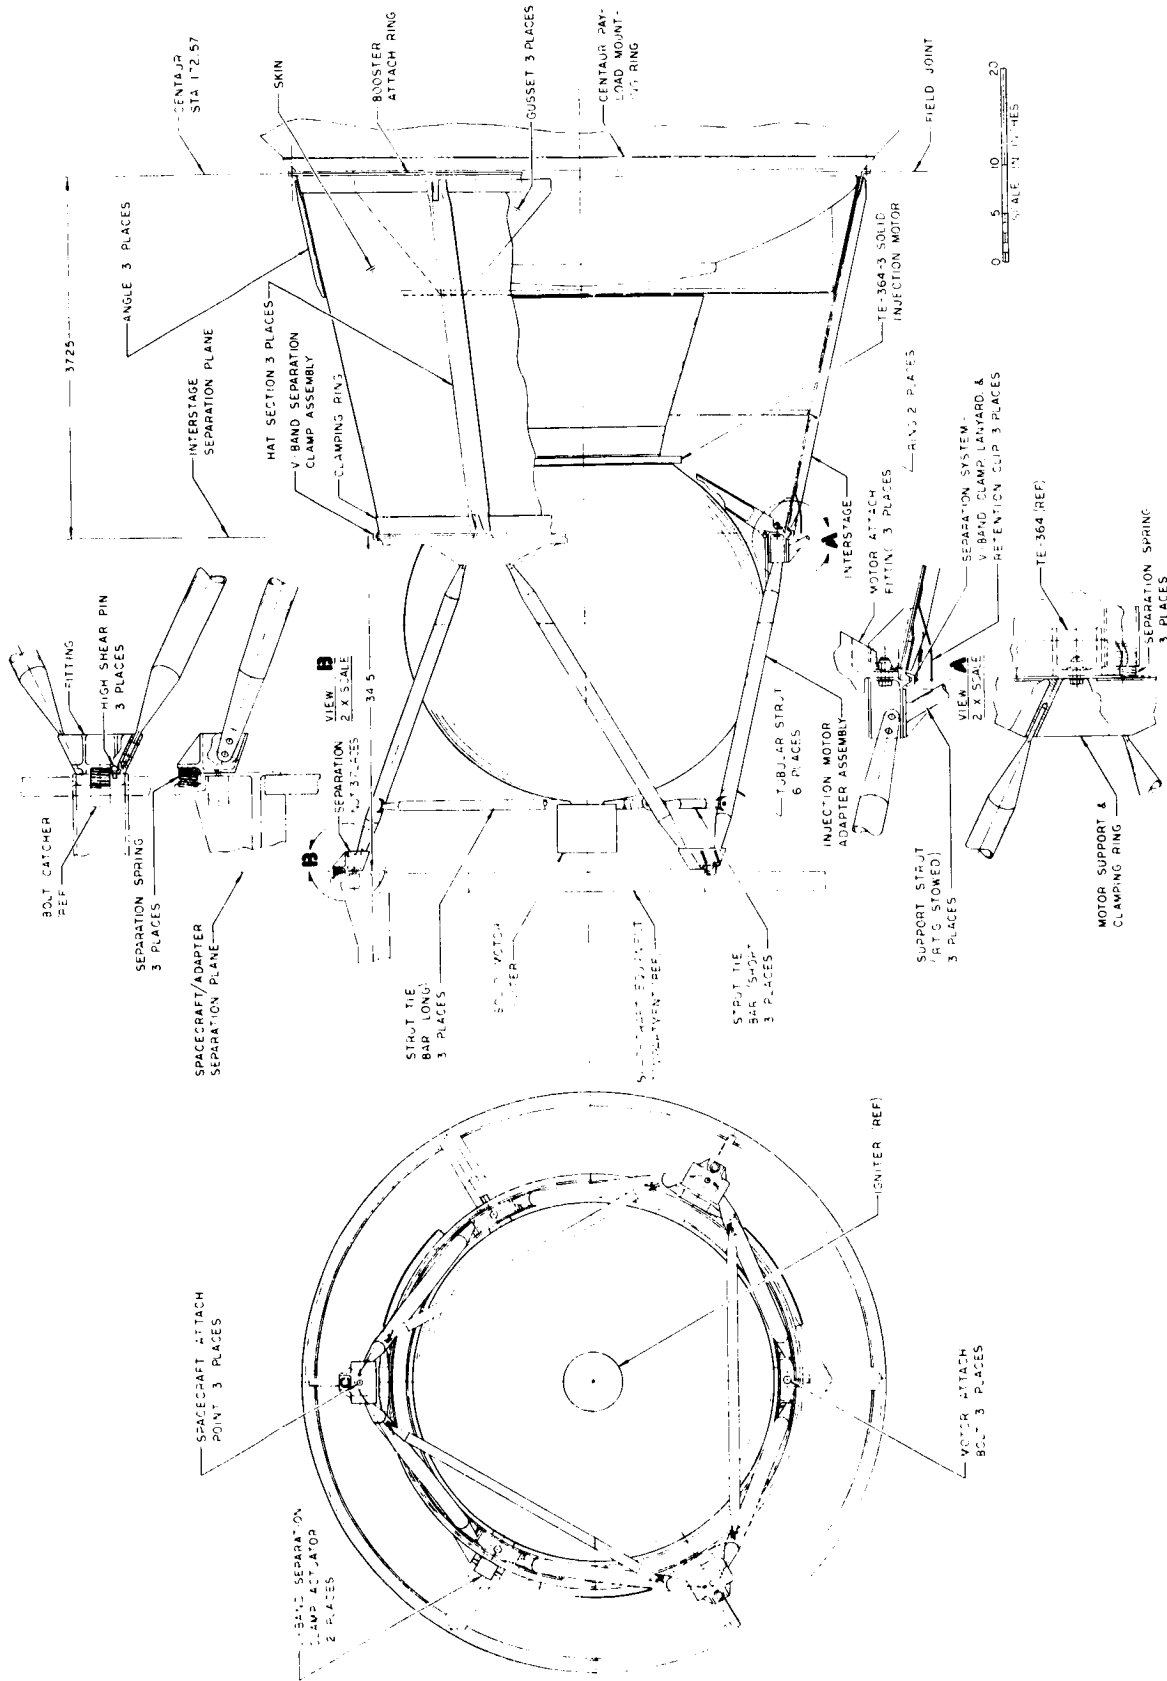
APP-Interstage and Injection Motor Adapter Assembly
